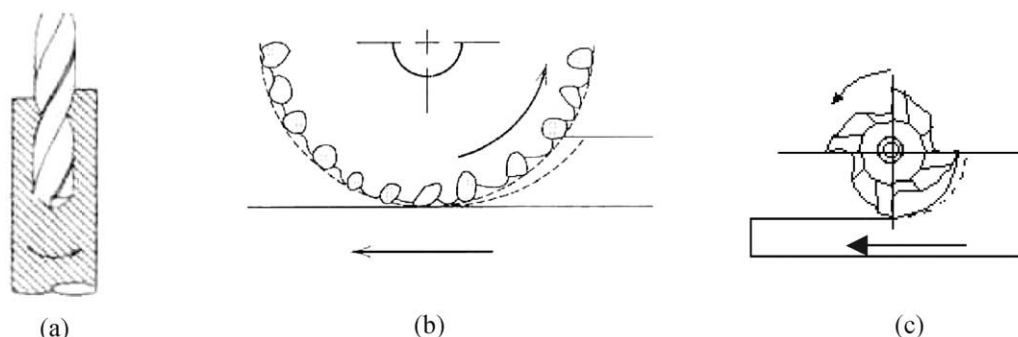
Schematic of the three machining operations—(a) drilling (b) grinding (c) milling—used in the present study.
